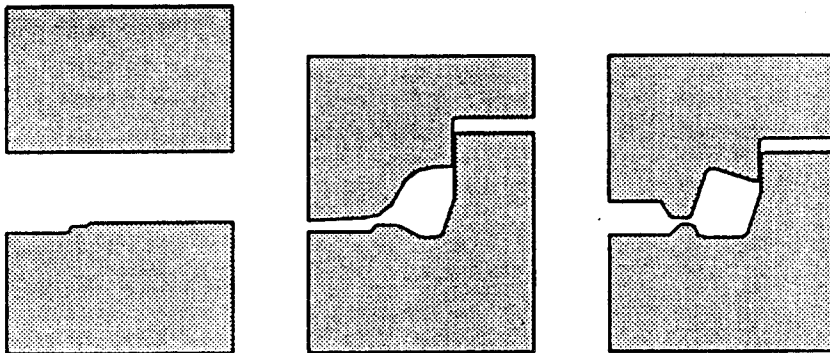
Schematic drawing of busting, and finishing die geometries of ring gear forging operation. Only 1st and 4th quadrants are shown.
